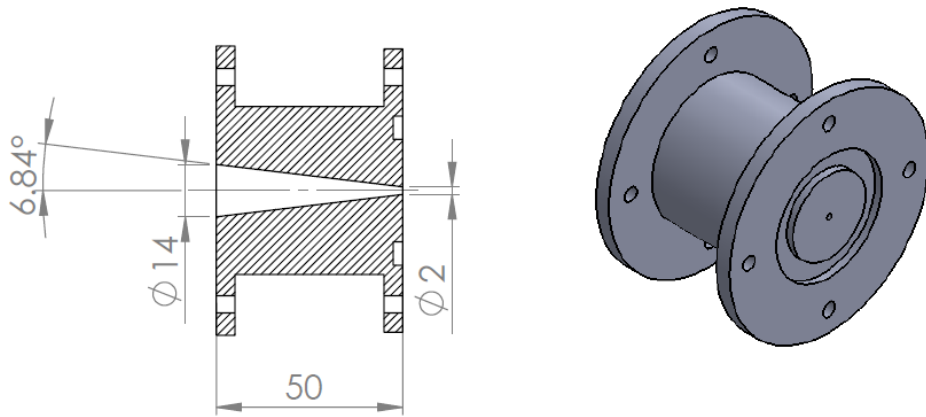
(Shows a 2D Drawing of The 50mm Diffuser)
